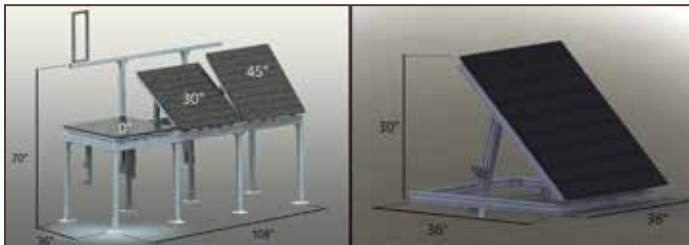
Adjustable Multi-Angle Corrosion Test Rack.
